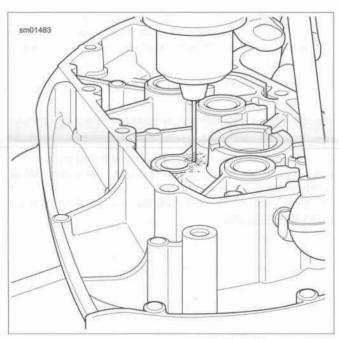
Drilling Pinion Bushing Dowel Pin Hole in Gearcase Cover
